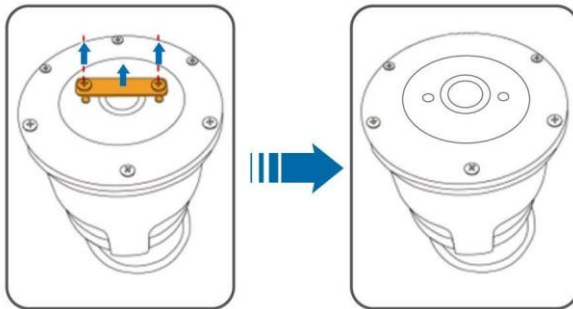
Removing the Pressure Relief Valve Locking Device
